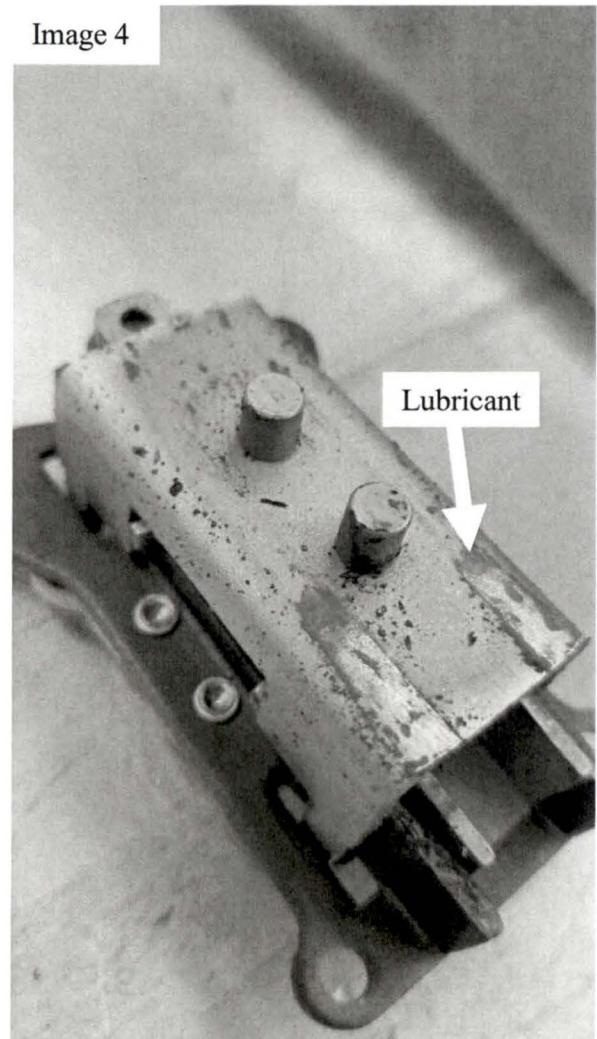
Latch assembly shows signs of dried lubricant causing binding during operation.
